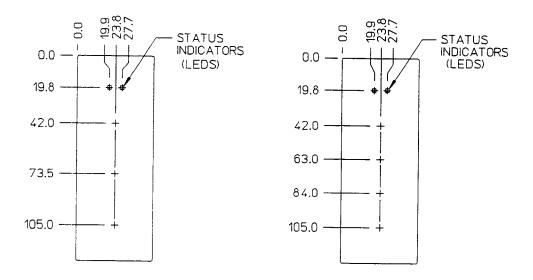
MODULE FRONT 3 & 4 COMPONENT GRIDWORK, 1 SLOT MODULE
